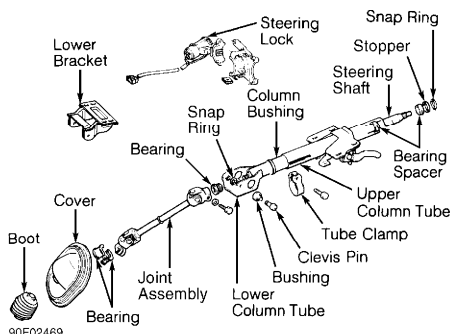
Exploded View Of Steering Column Assembly (All Models)
